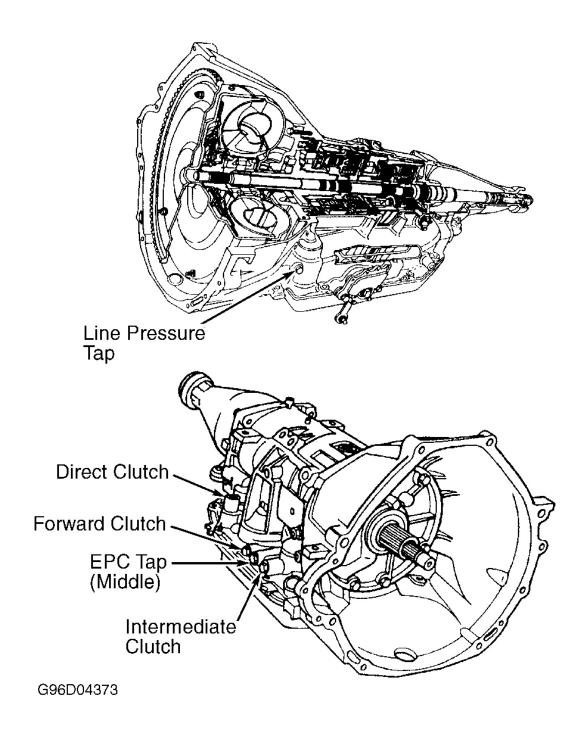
Identifying Hydraulic Pressure Taps Courtesy of FORD MOTOR CO.
